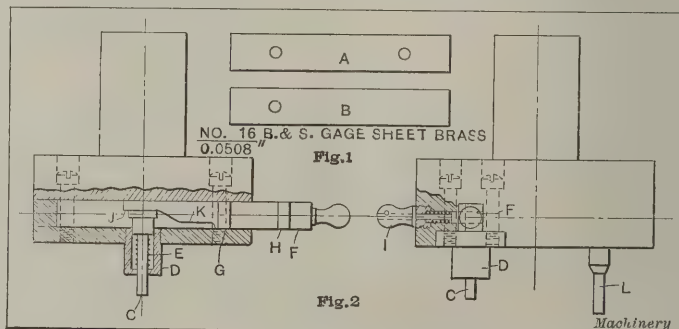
Blank to be pierced. Fig. 2. Adjustable Punch used in piercing the Blanks
